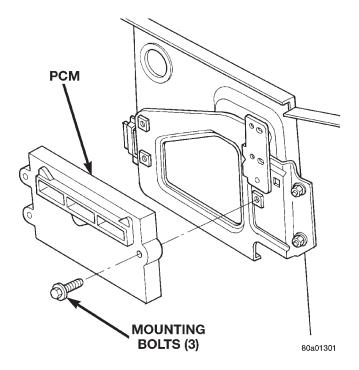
Powertrain Control Module (PCM) Mounting CRANKSHAFT POSITION SENSOR
